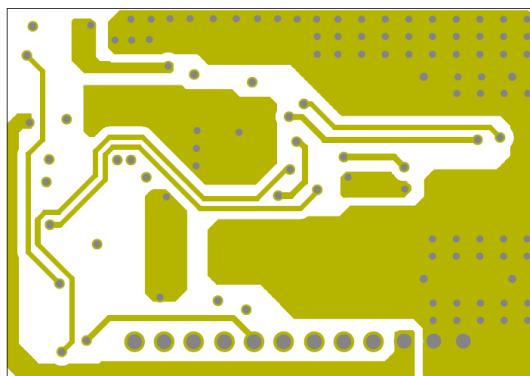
Daughter Board Printed Circuit Layout, Inner 1.
